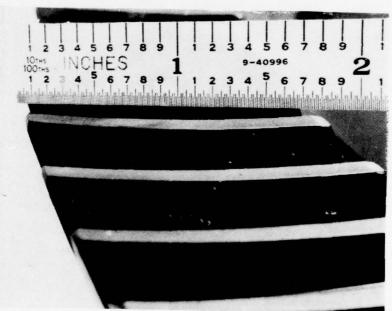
Main input gear teeth (drive side) showing light scoring after 25-minute loss-of-lube test of optimized transmission configuration number 1.
